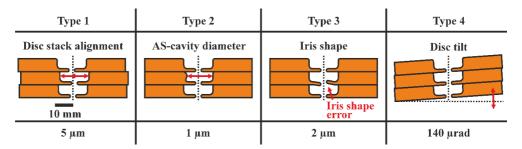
AS-cavity shape errors and their dimensional tolerances.
